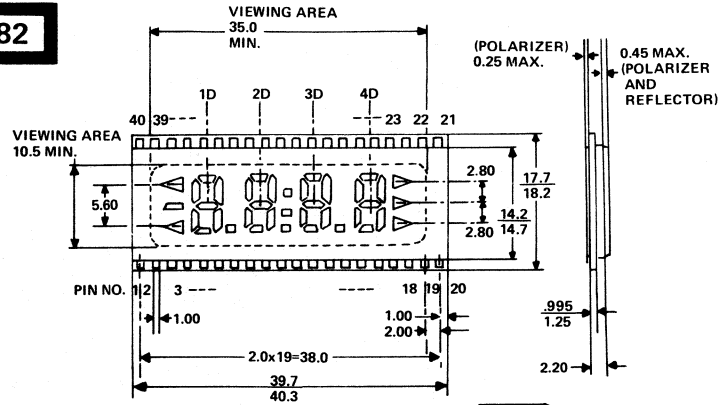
DETAILED OUTLINE DIMENSIONS
